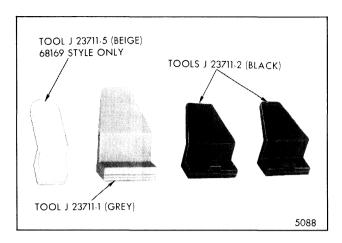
Glass Alignment Gauge Blocks - Tool J-23711 or Equivalent for "B and C" Styles (Consists Of A Set Of Four Blocks)
